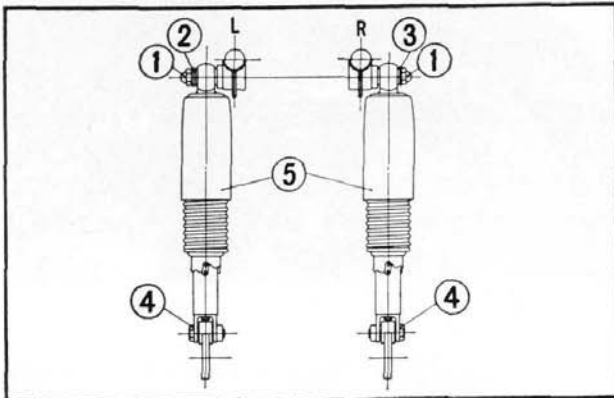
① 10 mm cap nuts ④ 10 mm bolts
